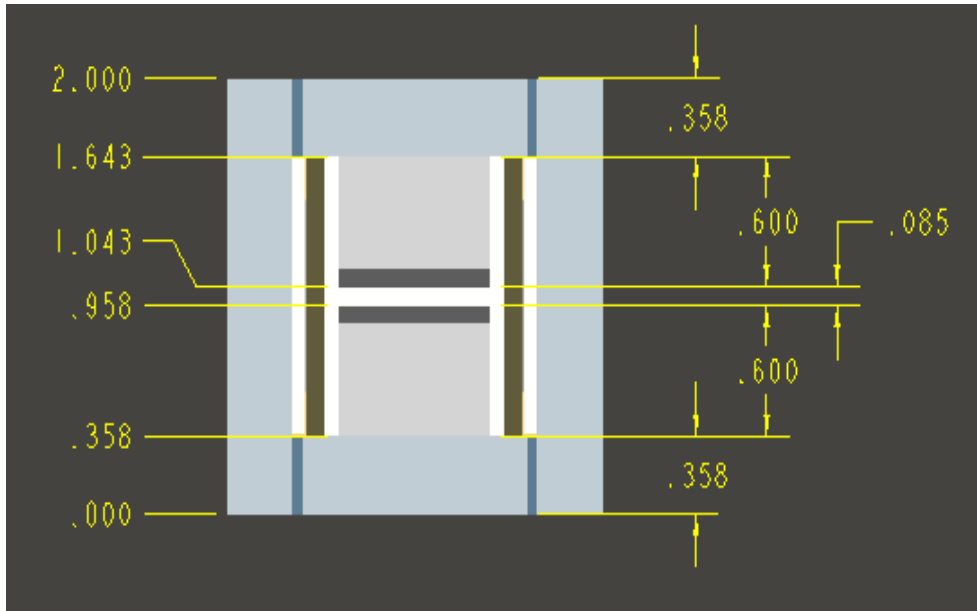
Proposed new cube cell assembly component dimensioning. This cell will allow two 0.600” inches parts per press cycle.
